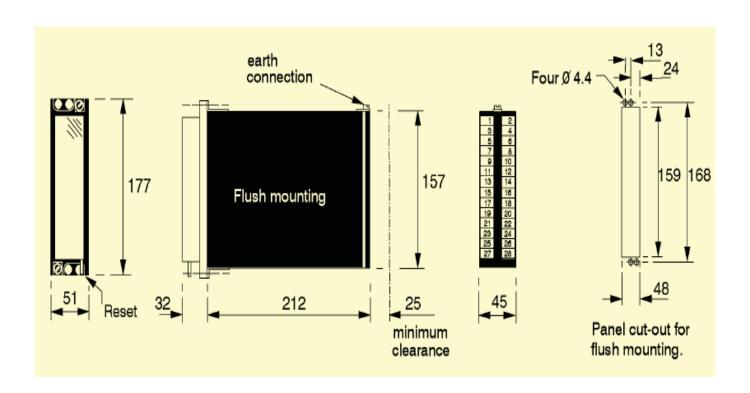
Dimensions of modular size 2 case (all dimensions are in mm)
